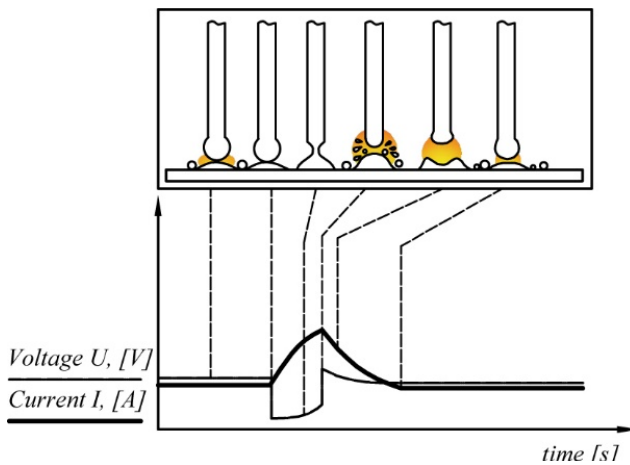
Conventional MAG-MIG welding process- creation and transfer of droplet
